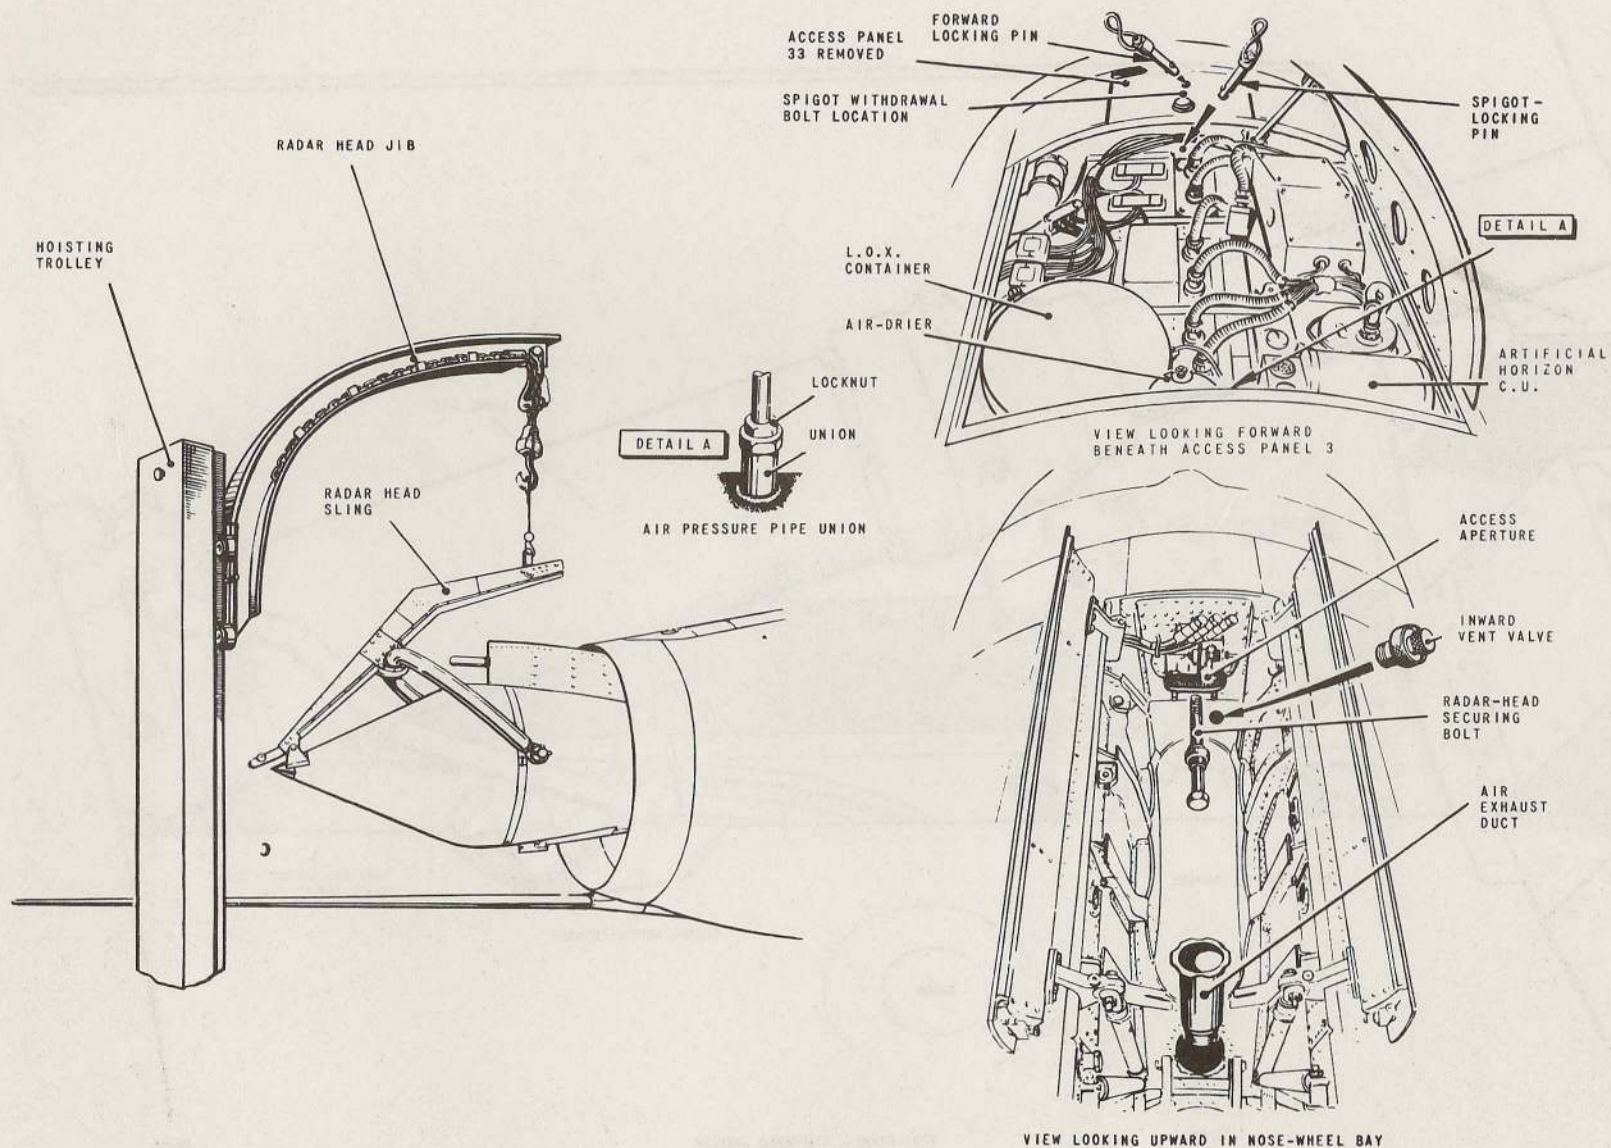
RADAR HEAD - REMOVAL AND ASSEMBLY
